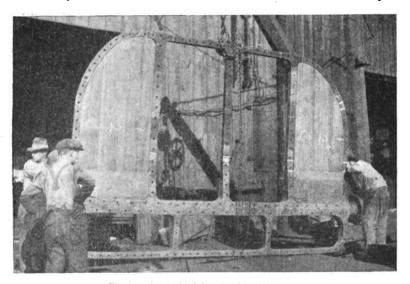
Arc-Welded Cast Steel Rudder Frame
